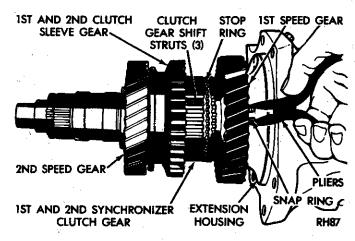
Compressing Mainshaft Rear Bearing Snap Ring
